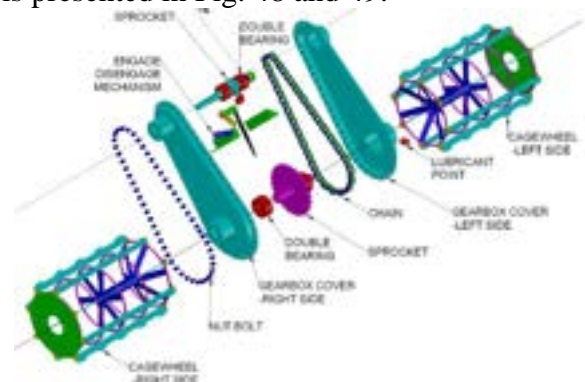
Exploded view of power transmission system between gearbox and cage wheel
